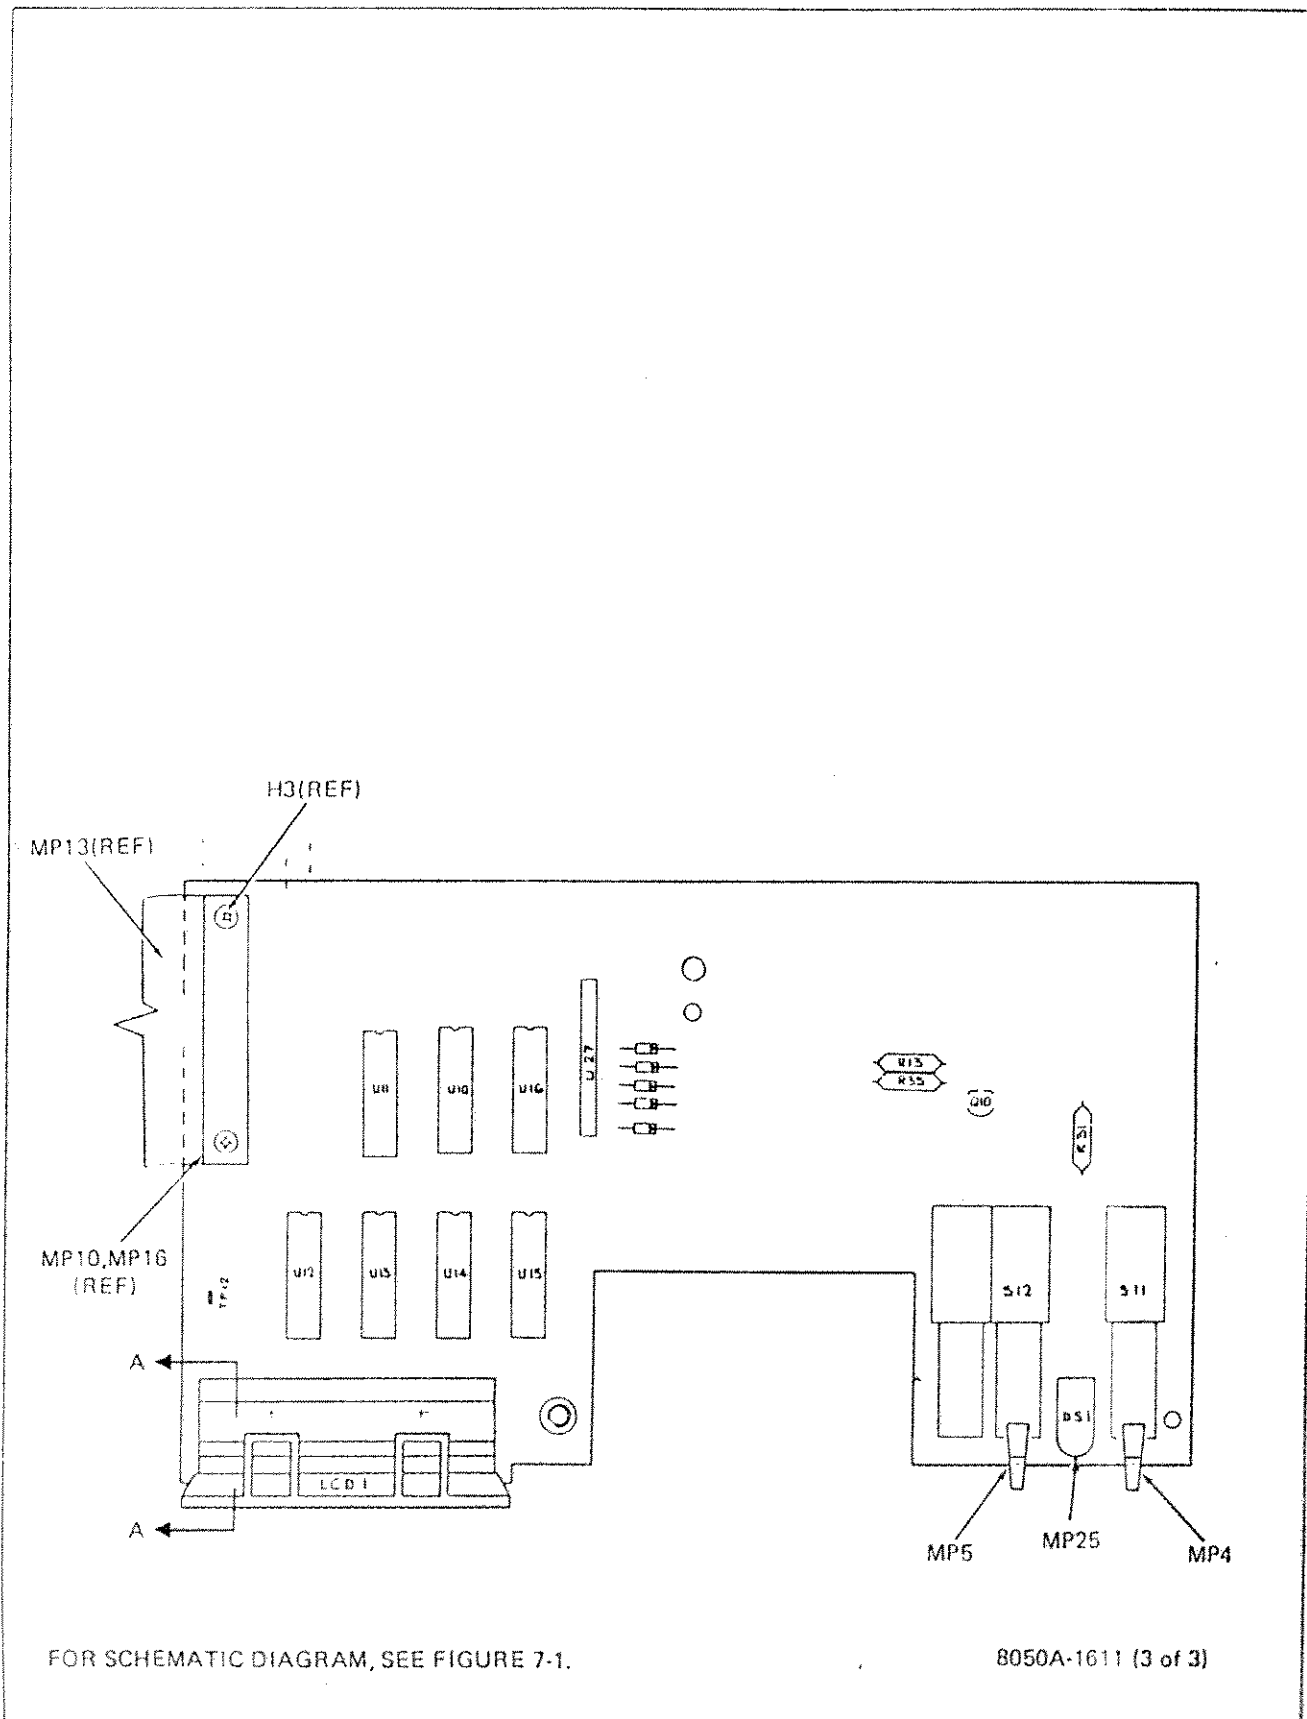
A1 Main PCB Assembly, Battery Option (cont)
